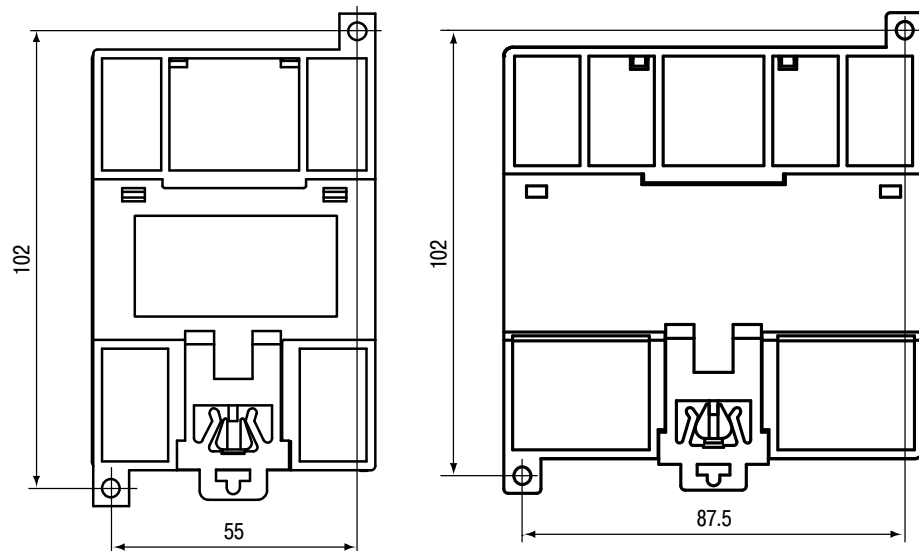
Wall mounting dimensions PR110-24.8D.4R (left) and PR110-24.12D.8R (right)
